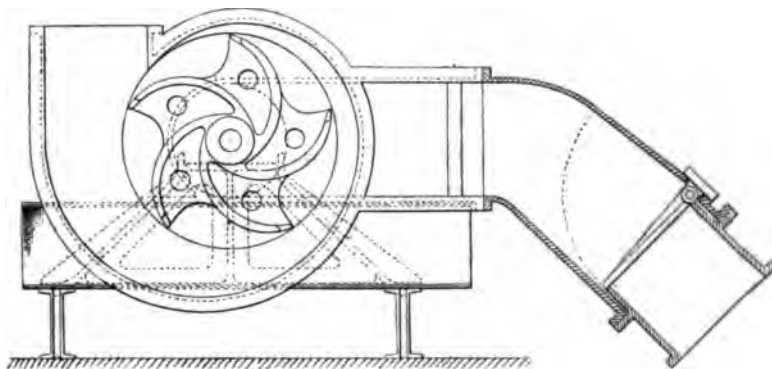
IVENS CENTRIFUGAL PUMP, HORIZONTAL SHAFT
